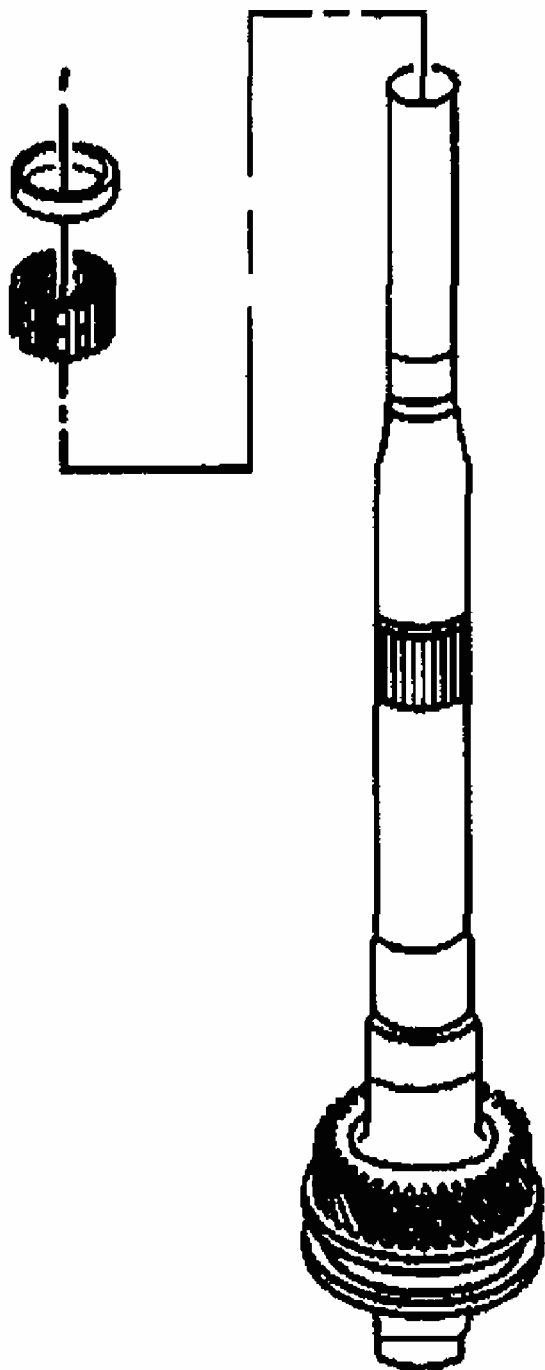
Installing New Mainshaft Small Tapered Bearing
